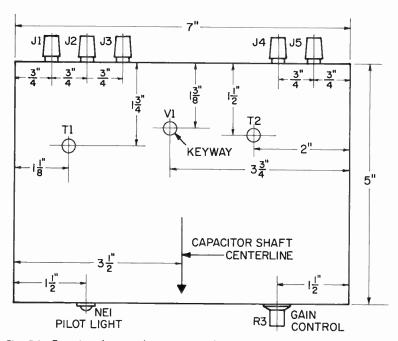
Top view drawing showing parts placement on the BCB Booster chassis. Rubber cement white paper to the top, front, and back sides of the chassis and mark all hole centers as shown in the drawing. Mounting holes for the tuning capacitor are marked with the unit held in place and its shaft located along the centerline. Parts mounted on the front and back sides are located midway from top to bottom of chassis.
